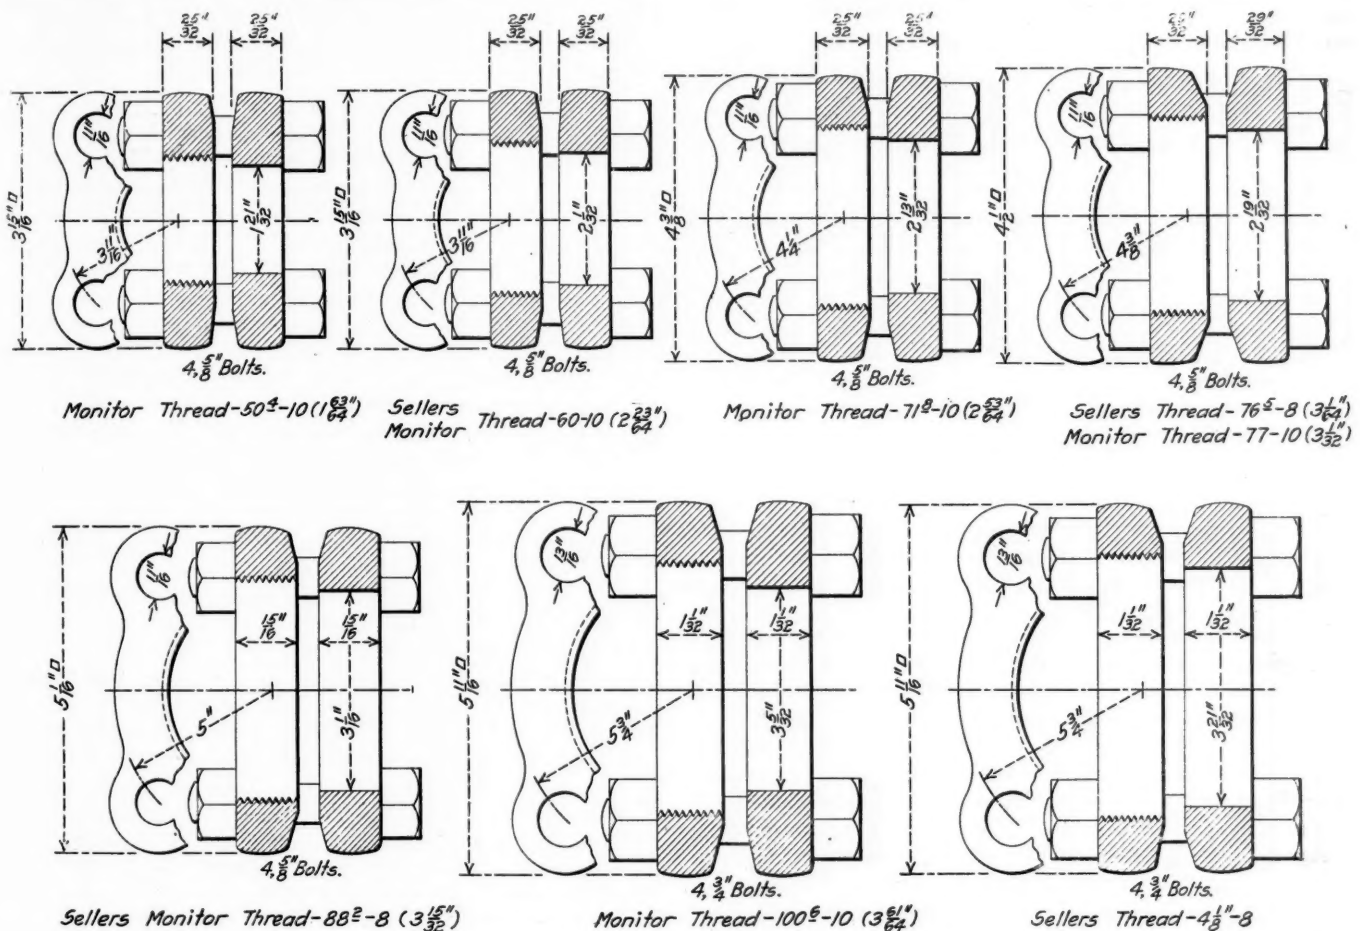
Connecting Flanges for Iron and Copper Pipe
